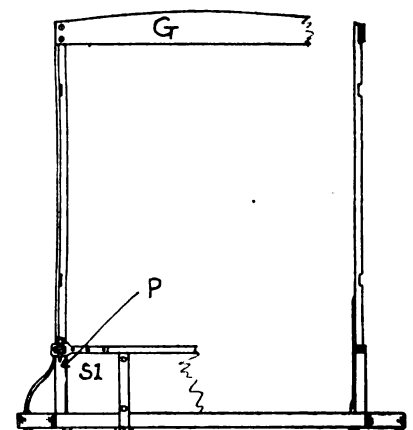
IS A REAR END VIEW OF BOX AND TOP
